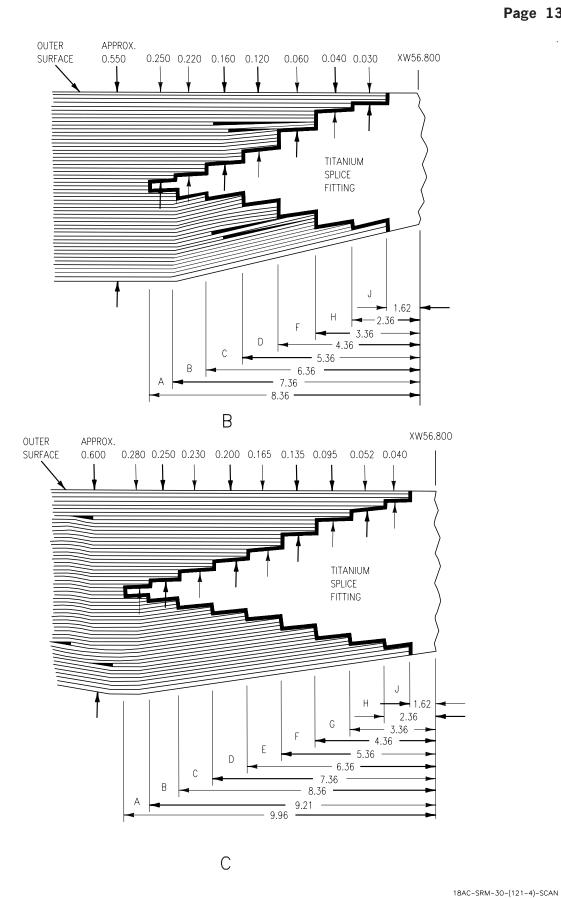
Inner Wing Upper Surface Titanium Splice Fitting Inspection Areas (Sheet 4)
